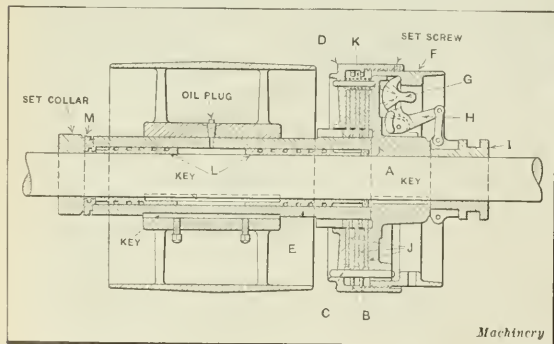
Sectional View of Moore & White High-speed Friction Clutch
